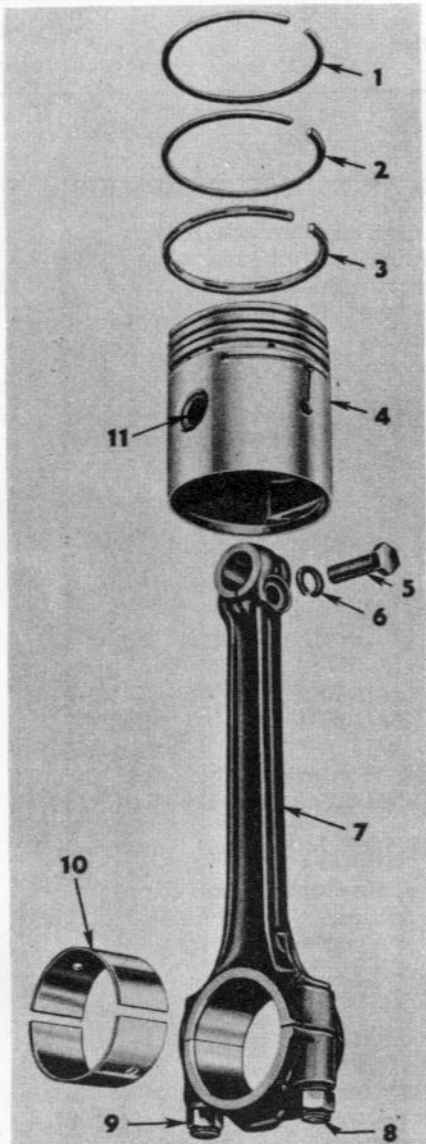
CONNECTING ROD AND PISTON 4L AND 4F
